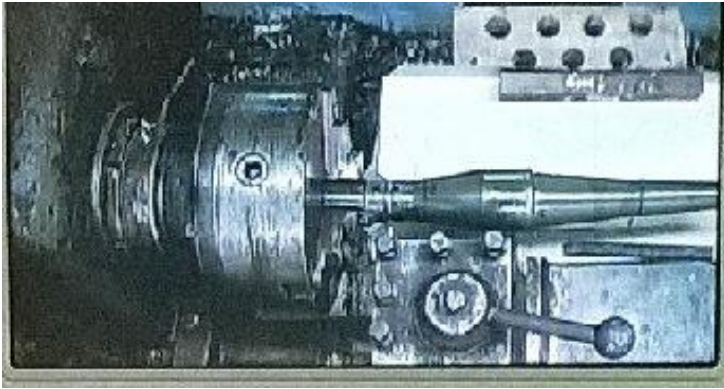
Disassembly of a PG-76 projectile warhead by cutting (viewed on a video monitor)
